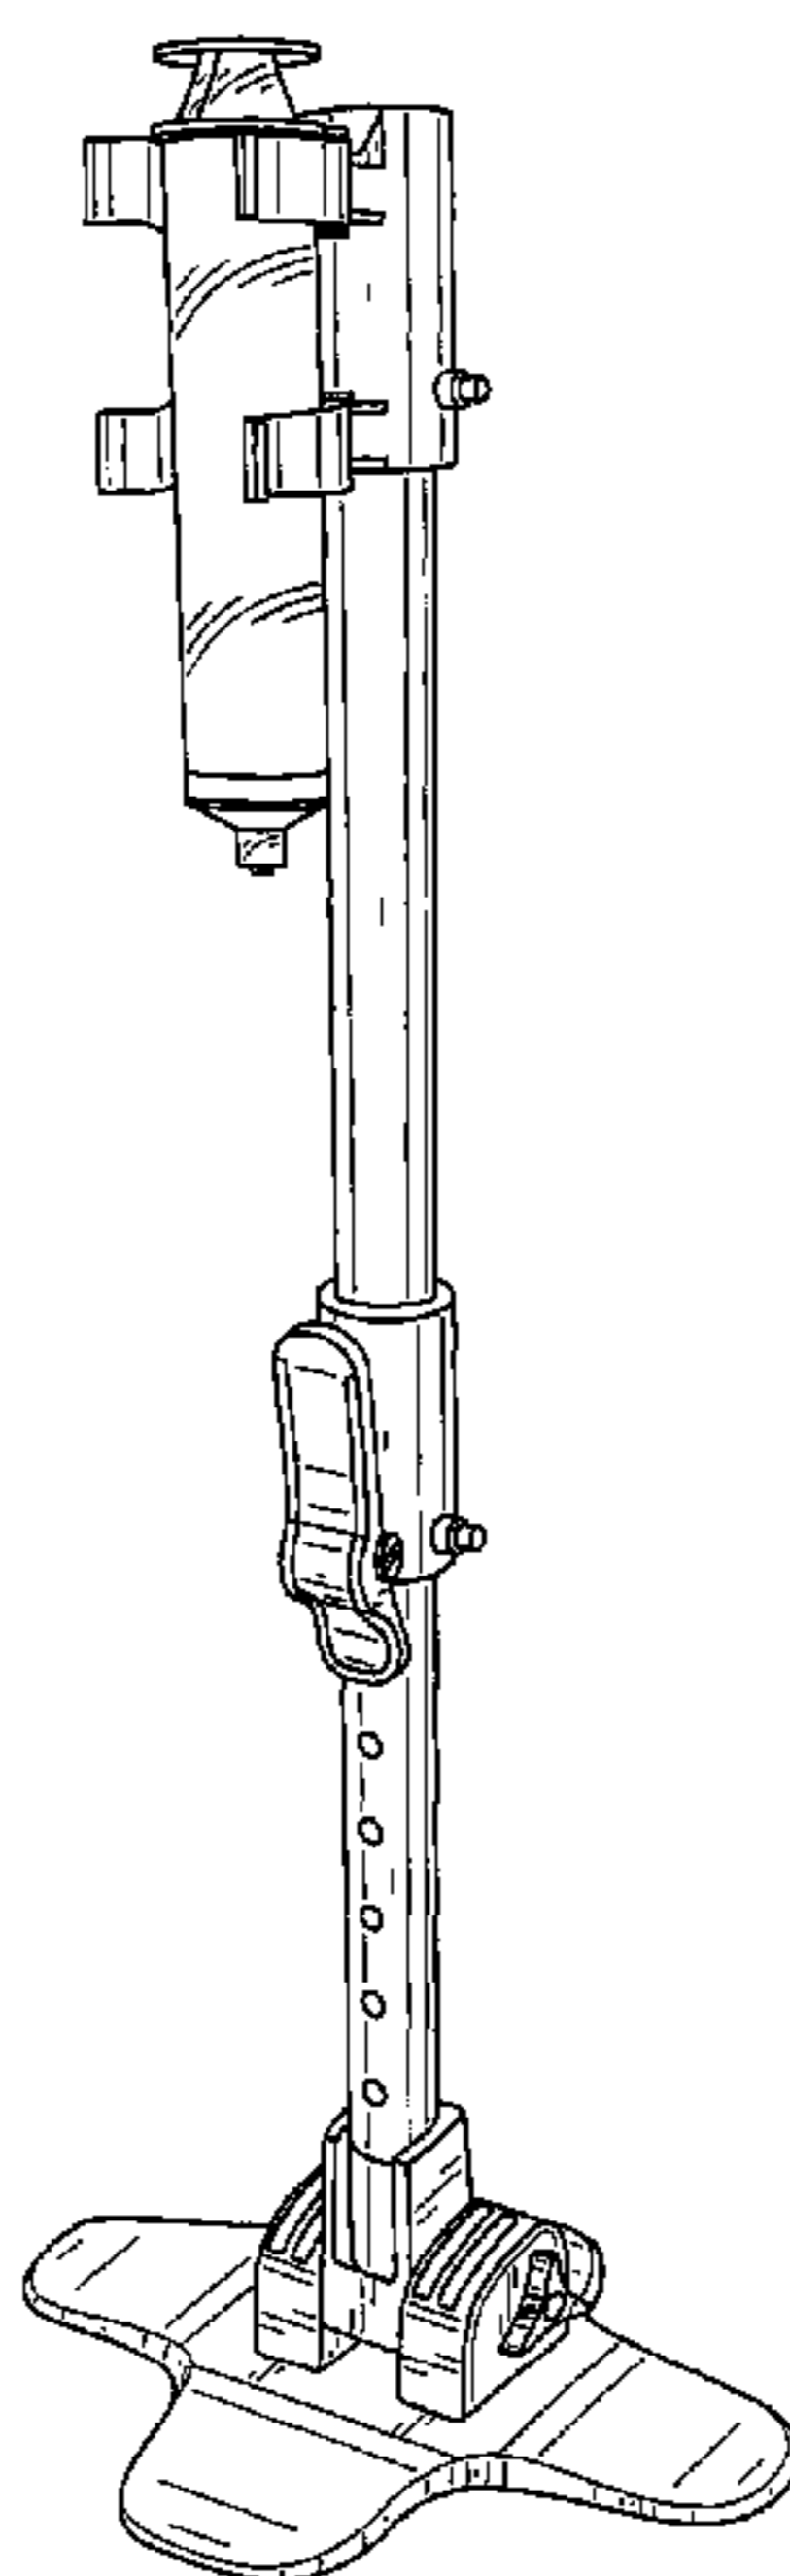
is a left side view of my new design for a support stand for a feeding tube.
